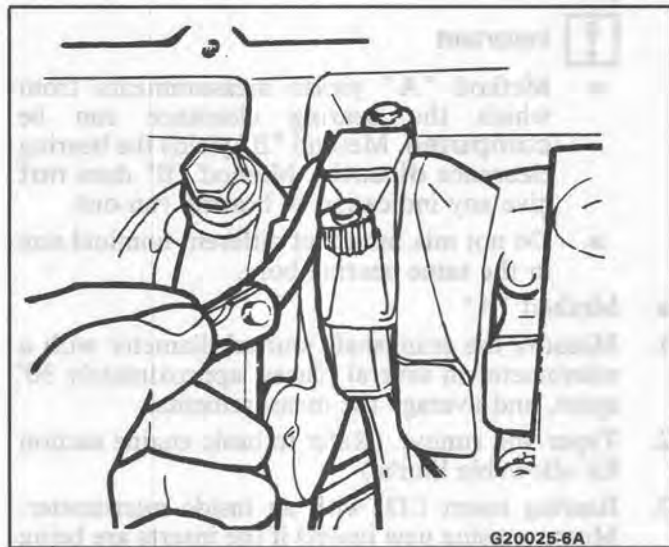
Measuring Connecting Rod Side Clearance (Single Rod Journal)
